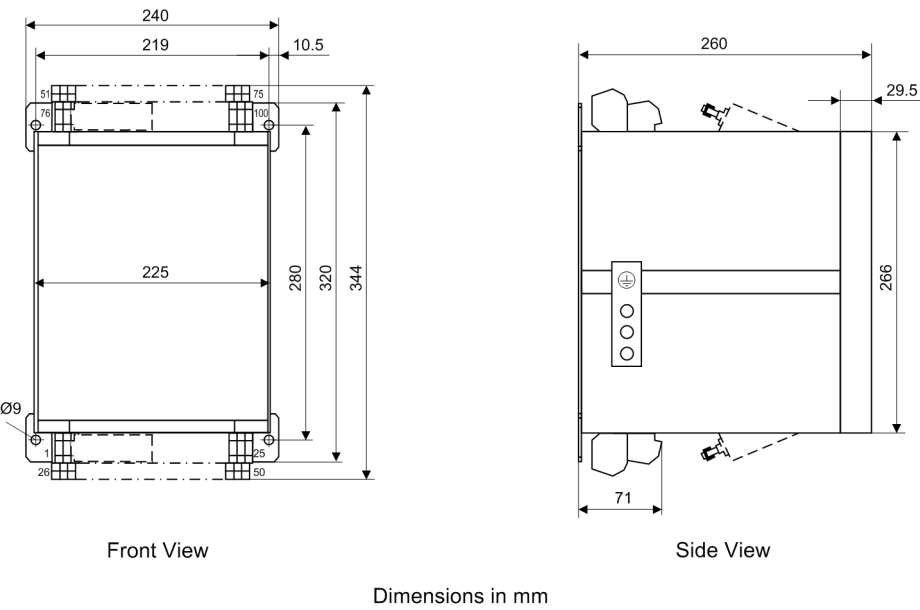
Dimensions of a device for panel surface mounting (size 1/2)
